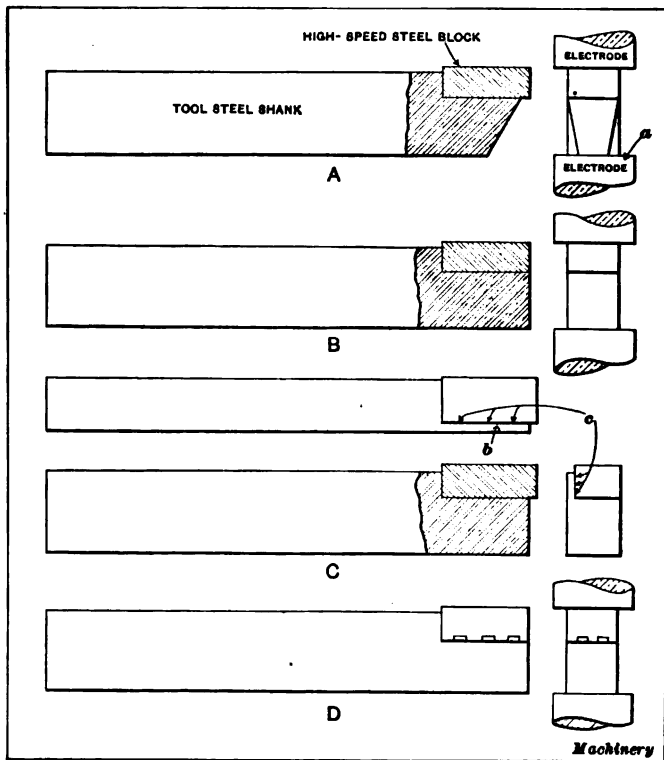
Correct and Incorrect Methods of welding High-speed Steel Blocks to Tool-steel Shanks
